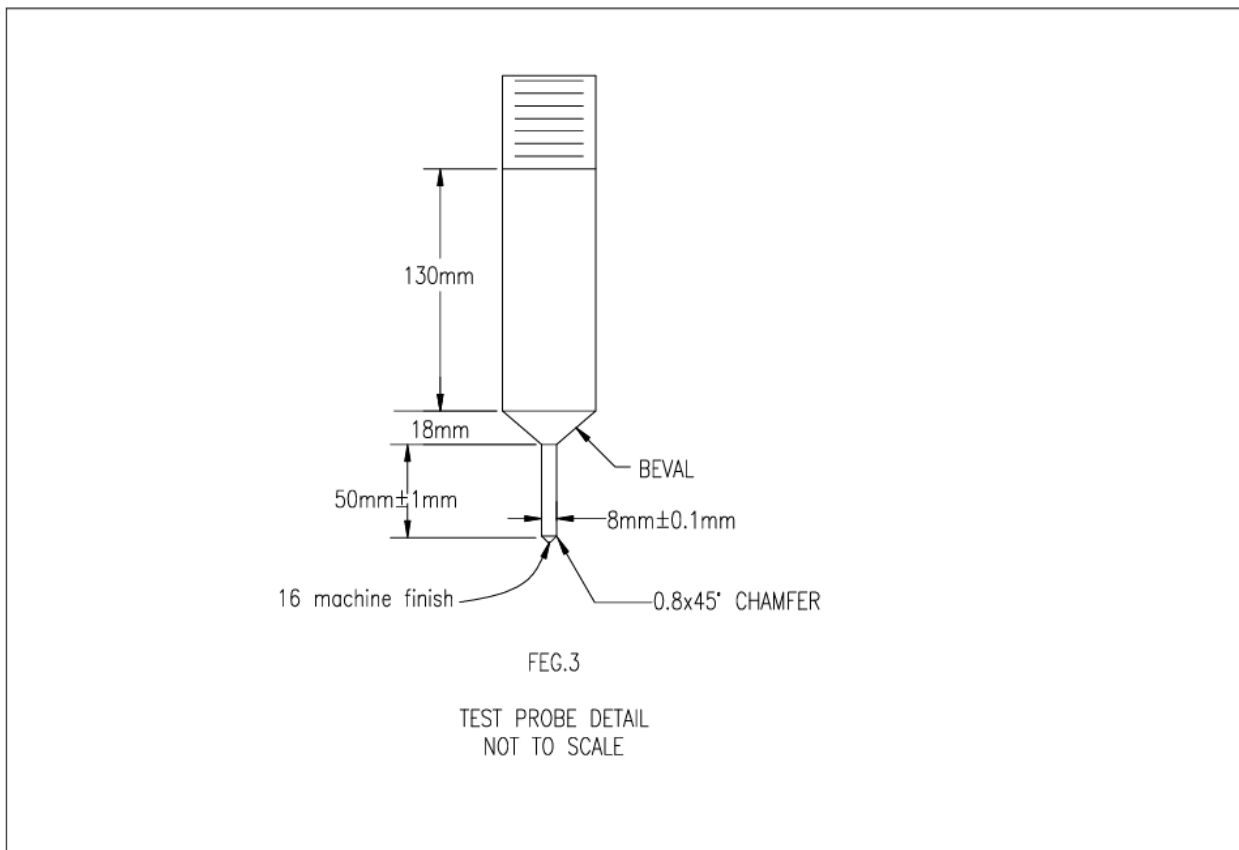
TEST PROBE DETAIL (NOT TO SCALE)
